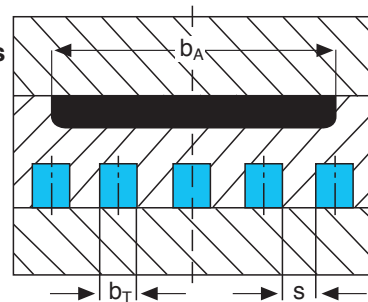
Optimum shape of heating/cooling channel in technical terms [13]
